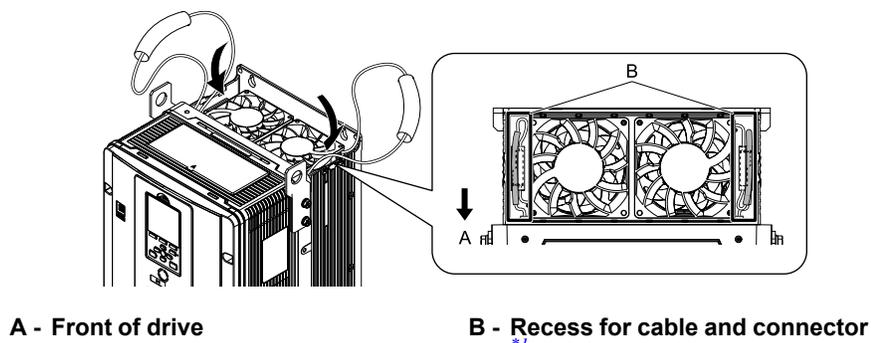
Put the Cables and Connectors in the Drive Recess
